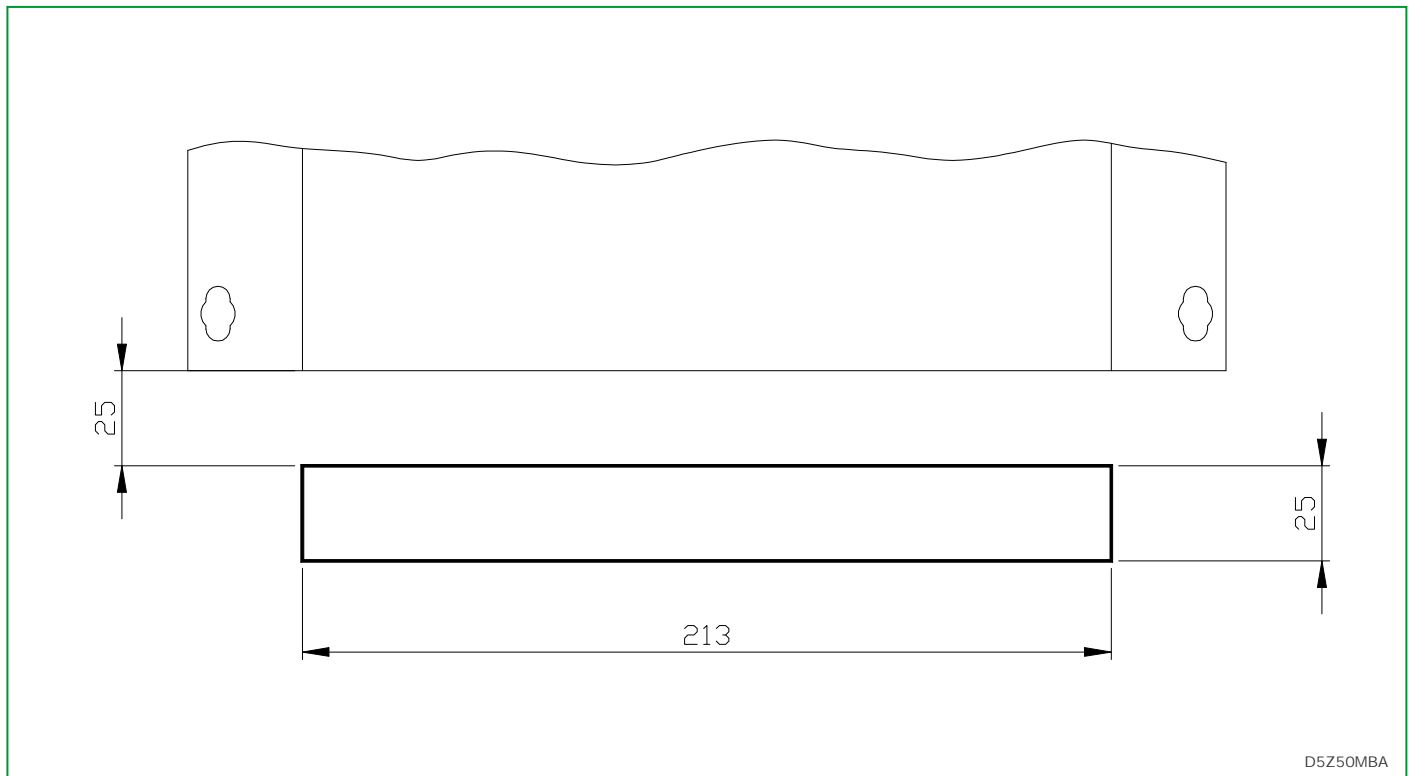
Opening (cutout) for running the connecting leads to an 40 TE surface-mounted case.
